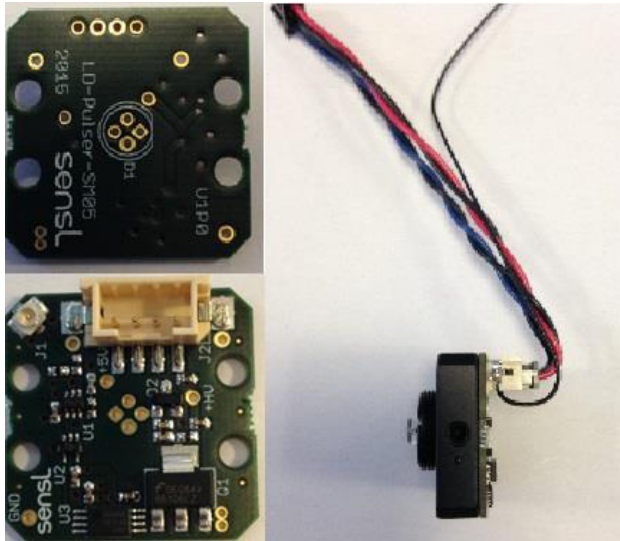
Top and Bottom Views of the Laser Driver PCB and Side View of the PCB Mounted to the Laser
